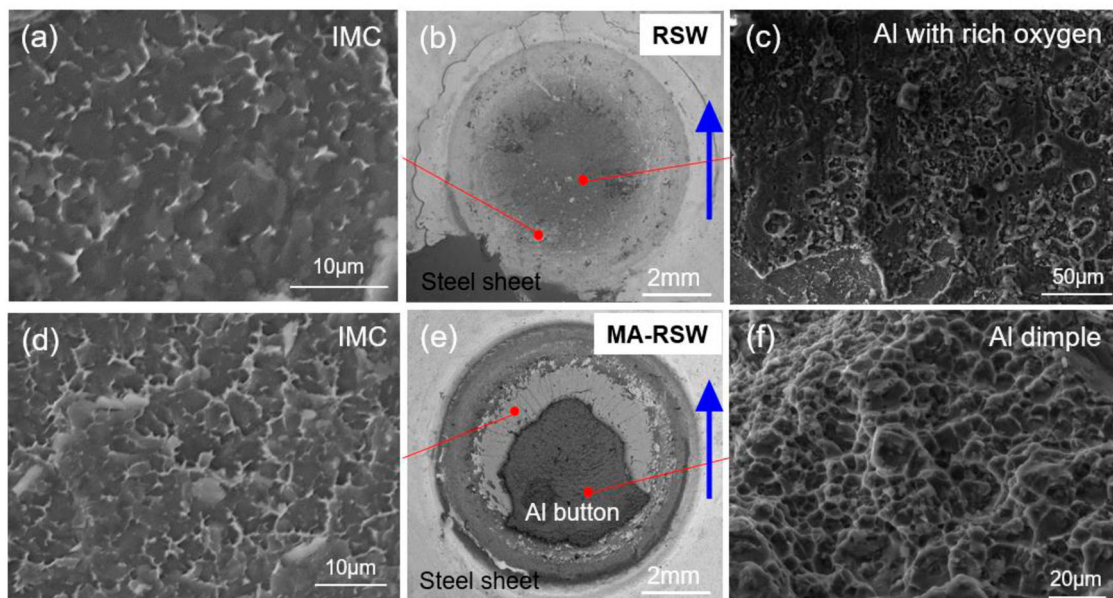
Fractographies of (b) RSW and (e) MA-RSW welds in back-scattered electron mode. (a, c) Partial enlarged images of the RSW weld. (d, f) Partial enlarged images of the MA-RSW weld. Blue arrow represents the direction of peel in mechanical experiments.
